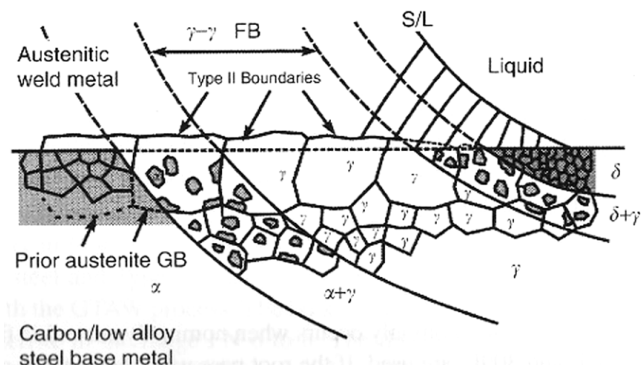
Mechanism of Type 2 boundary formation during dissimilar metal welding between an austenitic weld metal and carbon steel. (8) (19)
